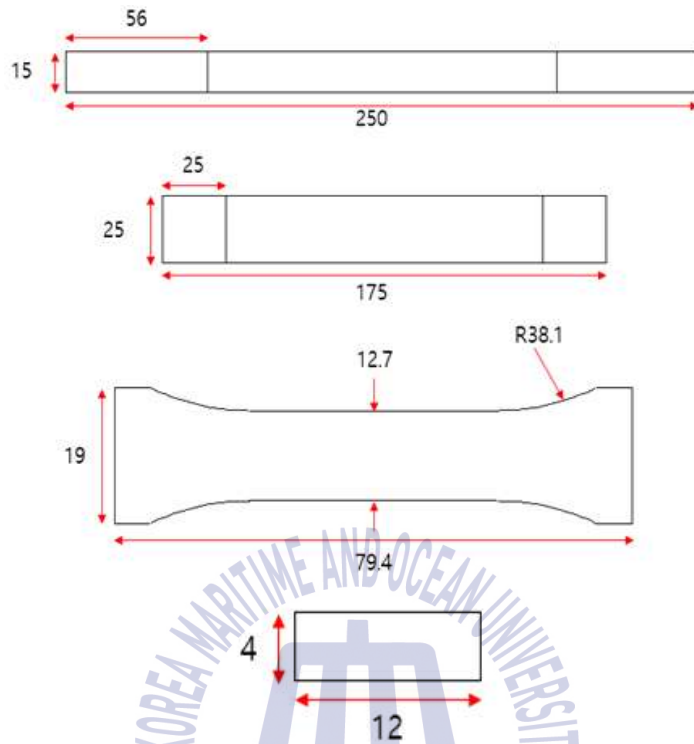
Test specimen (Tensile 0° ,90° , Compressive, short beam)
